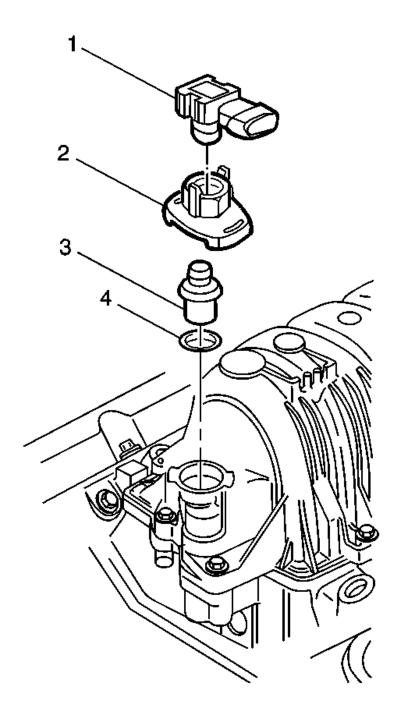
Identifying PVC Valve & Related Components Courtesy of GENERAL MOTORS CORP.
